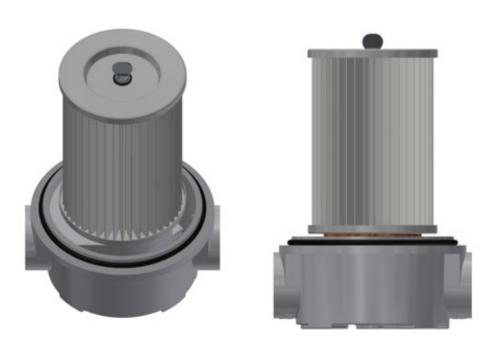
O-ring seated evenly on casting sealing surface.
